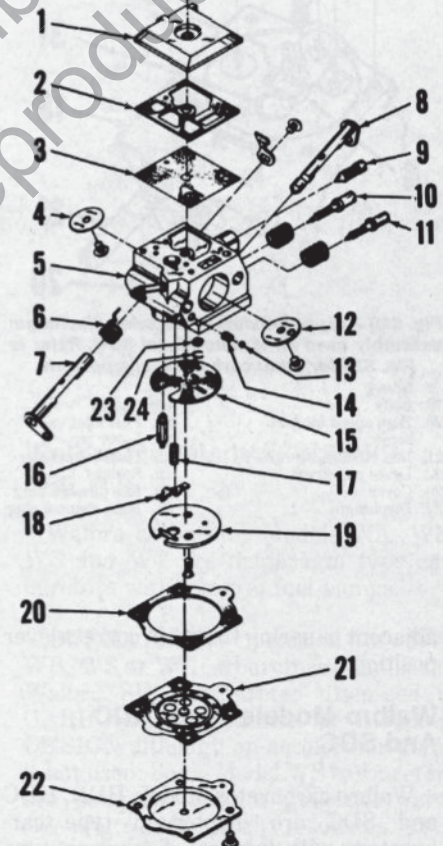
Exploded view of Walbro Model HDB and HDC carburetors.
